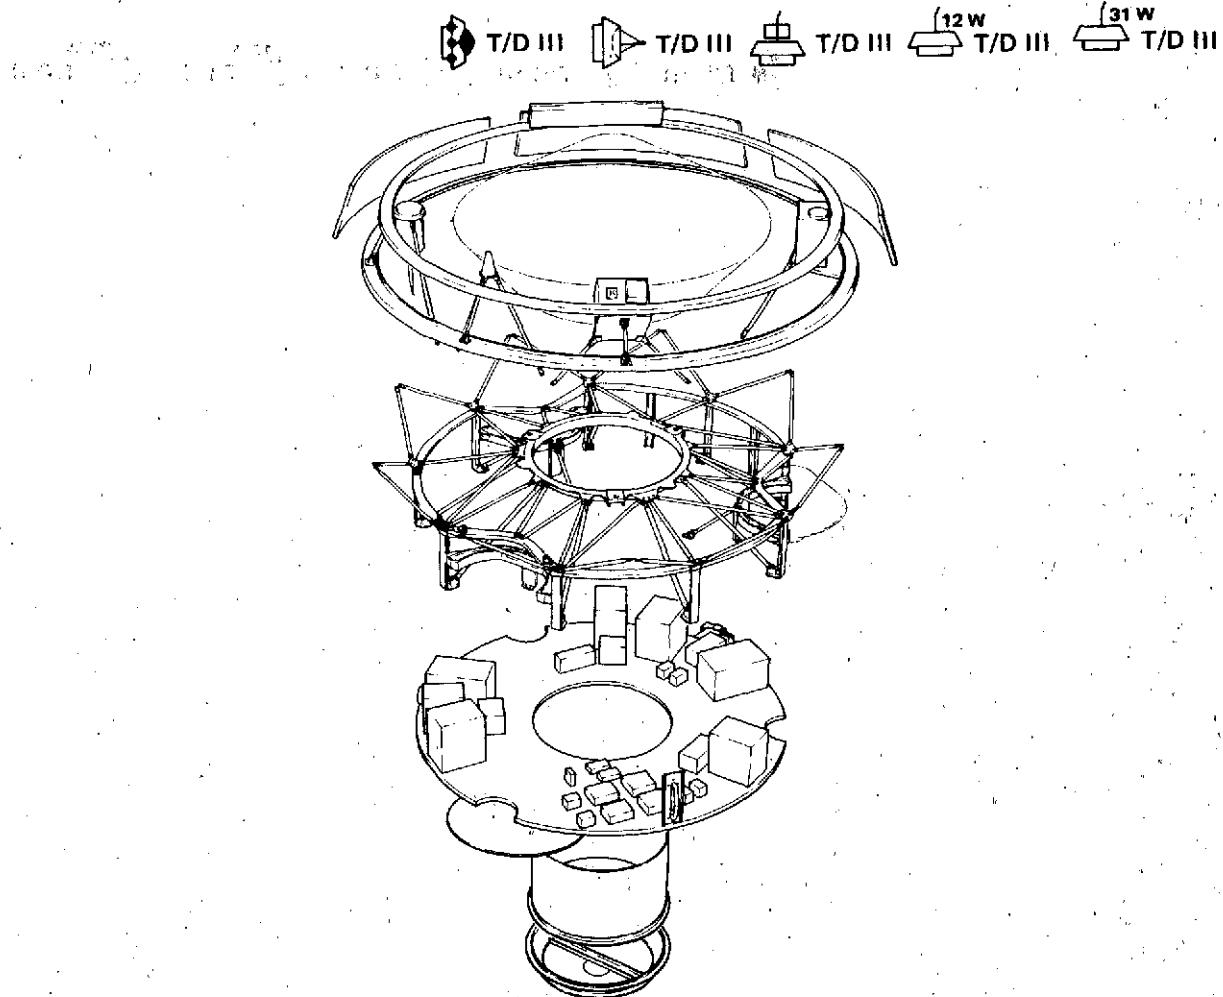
Exploded View of Thor/Delta Probe Bus Spacecraft
